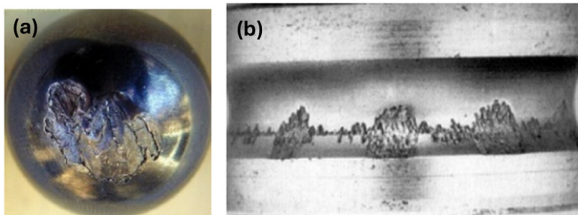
Condition of damaged ball bearings and raceways: (a) torn ball bearings and (b) scratches on the raceways.
